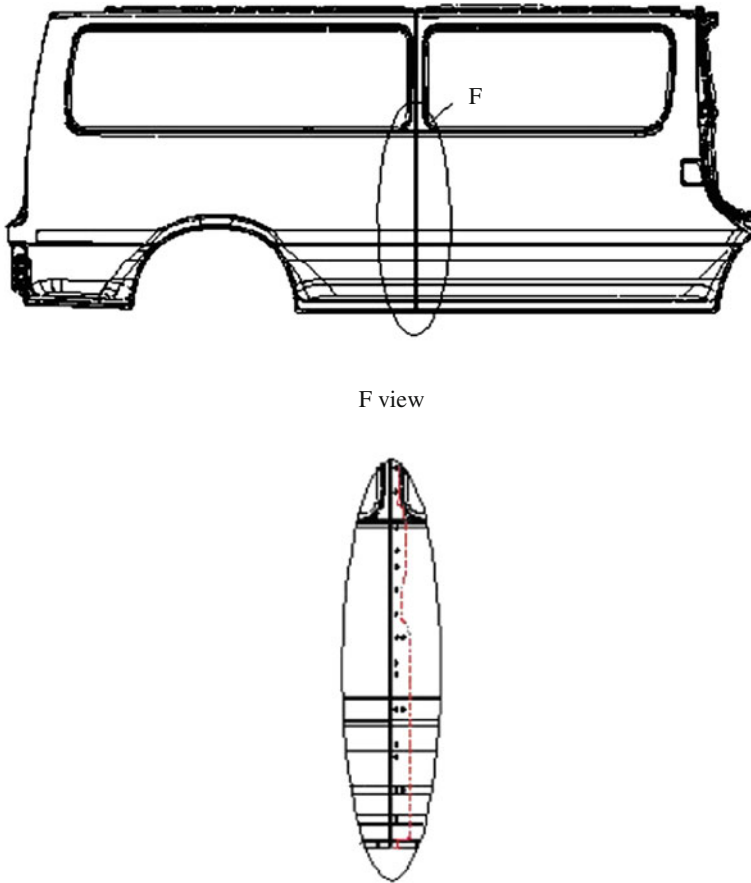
The Position and The Form of The Weld Spot for Front and Rear Side
